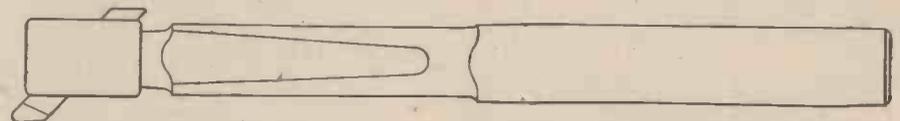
A slide-rest boring tool holder. The cutter is locked by a wedging action of the collar forcing the cutter against a flat on the shank.
